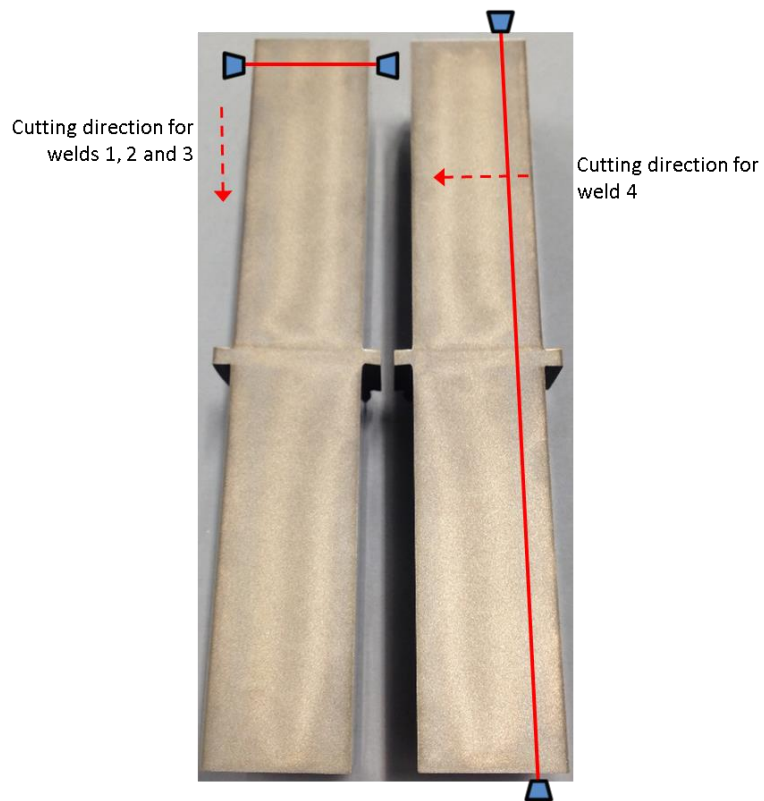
EDM cut directions for the welds 1, 2, 3 and 4
